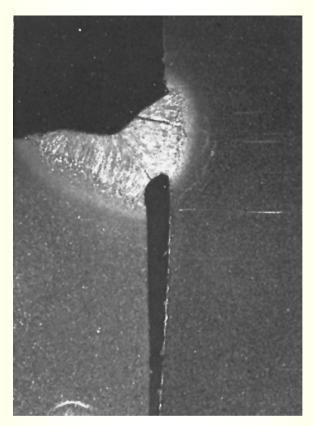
Crack in a weld bead. The two welded components were not allowed to contract freely after the weld was completed. *Source:* Courtesy of Packer Engineering.
